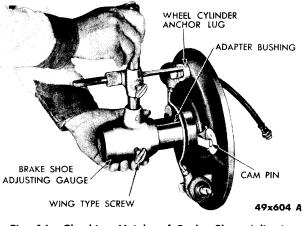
Checking Height of Brake Shoe Adjusting Pin, Using Tool MT-19-L
